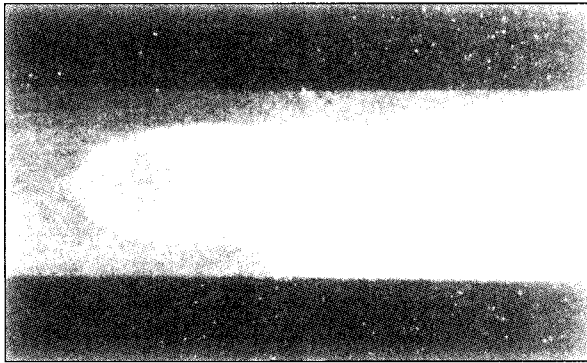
Macro section of spot welded joint by insulated tip
